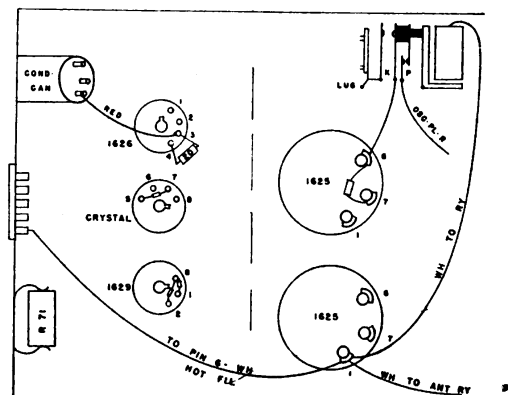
UNDER CHASSIS VIEW BEFORE CONVERSION.
